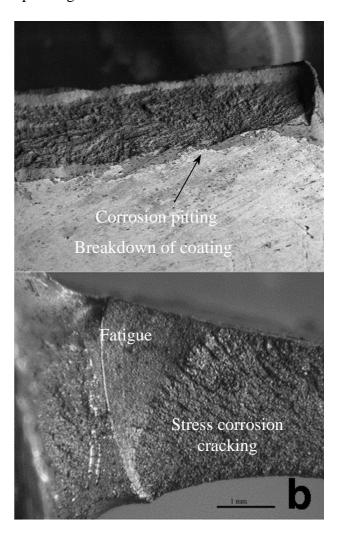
In-plane Stress Corrosion Cracking which then transitions to fatigue cracking. (a) The origin of the SCC at a pit, (b) the transition to fatigue.
